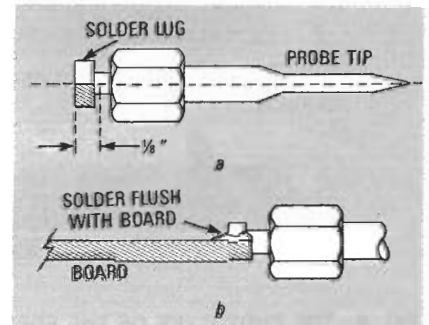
TO MOUNT THE LOGIC PROBE TIP onto the frequency probe PC board, file 1/8-inch of the bottom of the hex-nut-shaped solder lug flat down to the centerline of the logic probe tip. Then, solder it flush to the correct pad on the component side of the PC board.
